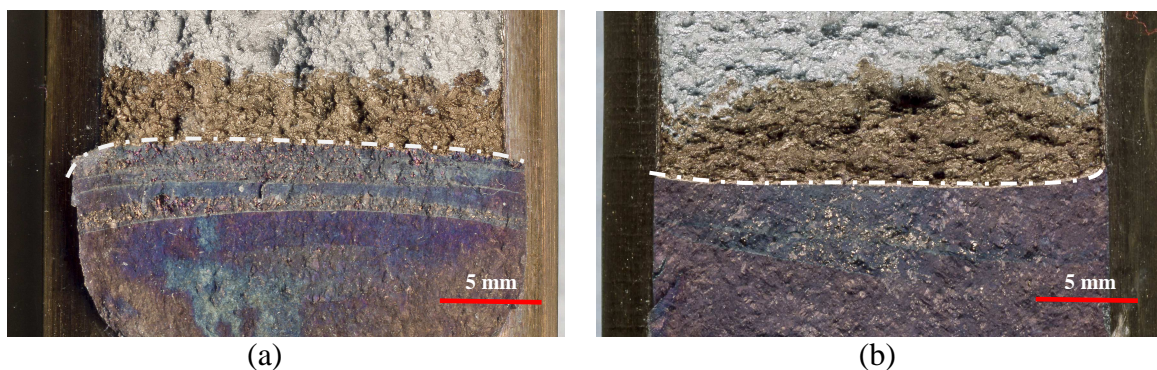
(a) Fatigue pre-cracking performed before side grooves operation and (b) fatigue pre-cracking performed after side grooves operation. White dashed line: fatigue pre-cracking front.
